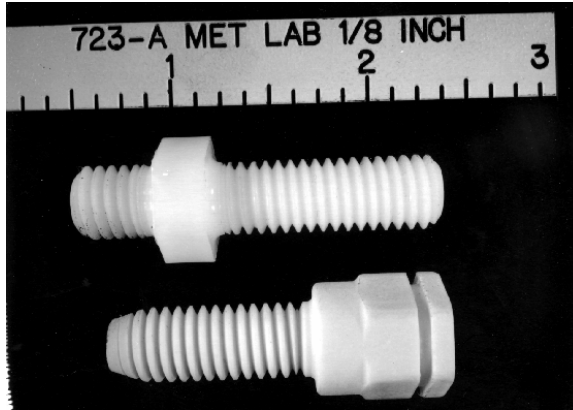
Pressure relief nozzle types. Type A (new design) was used in the October 2 failure. Type B (old design) was used in both December failures. Note the longer taper on Type B versus Type A.
